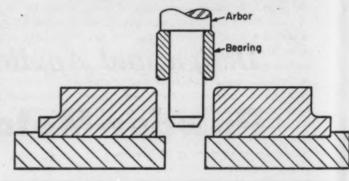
Pressing a straight sleeve bearing into place with a shouldered arbor
